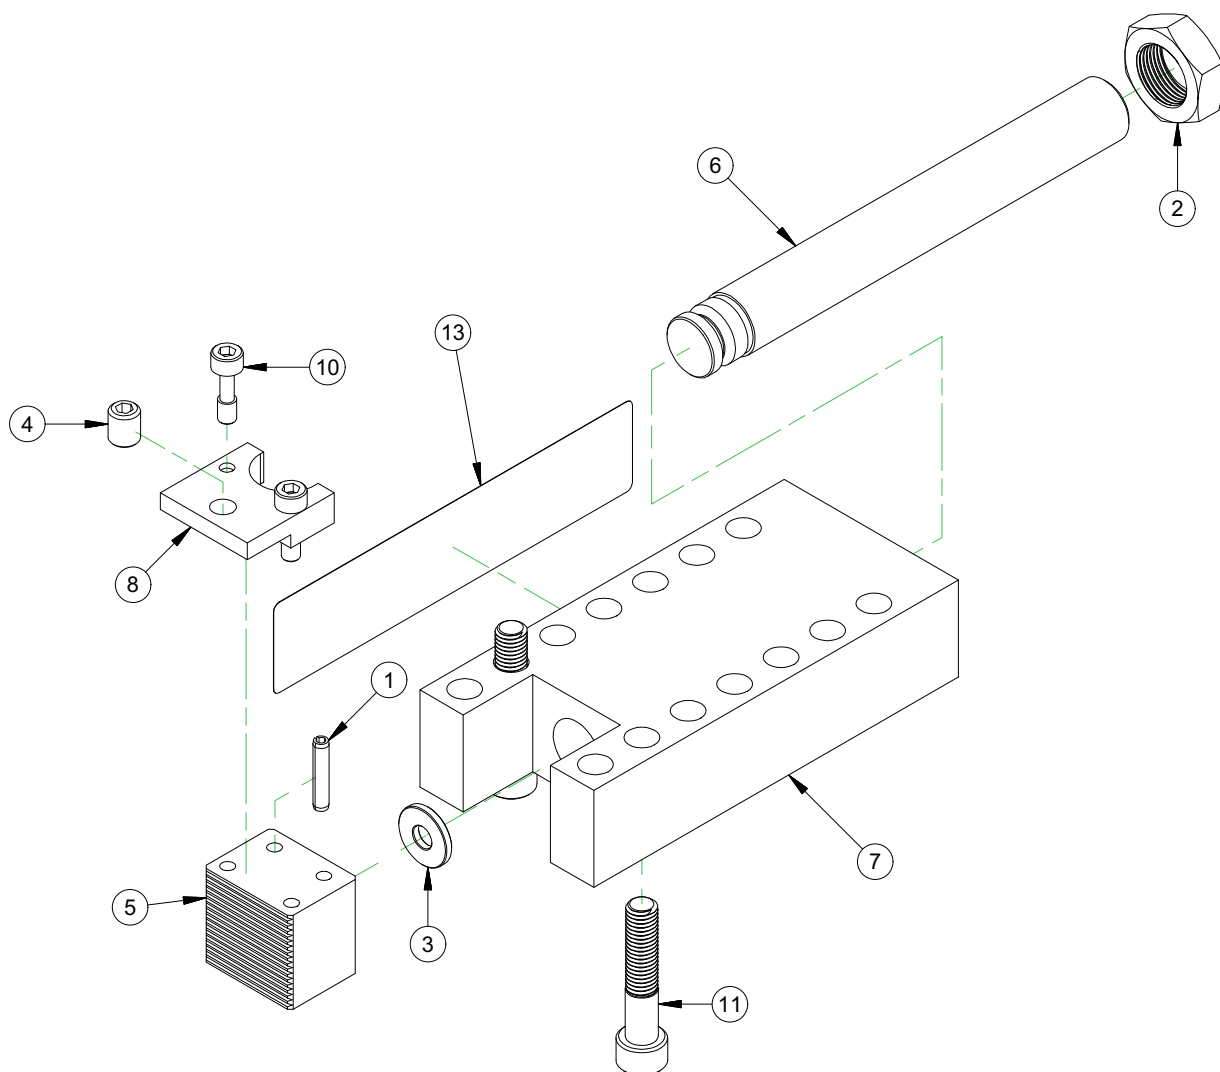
TOOL HEAD ASSEMBLY (P/N 80407)
